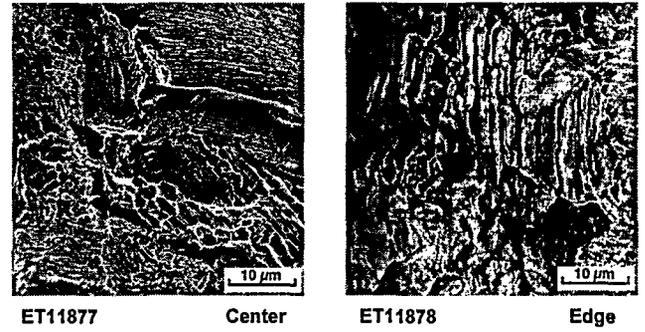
SEM photographs of the center and edge of the fracture surface of the as-received In 718 specimen tested in air.
